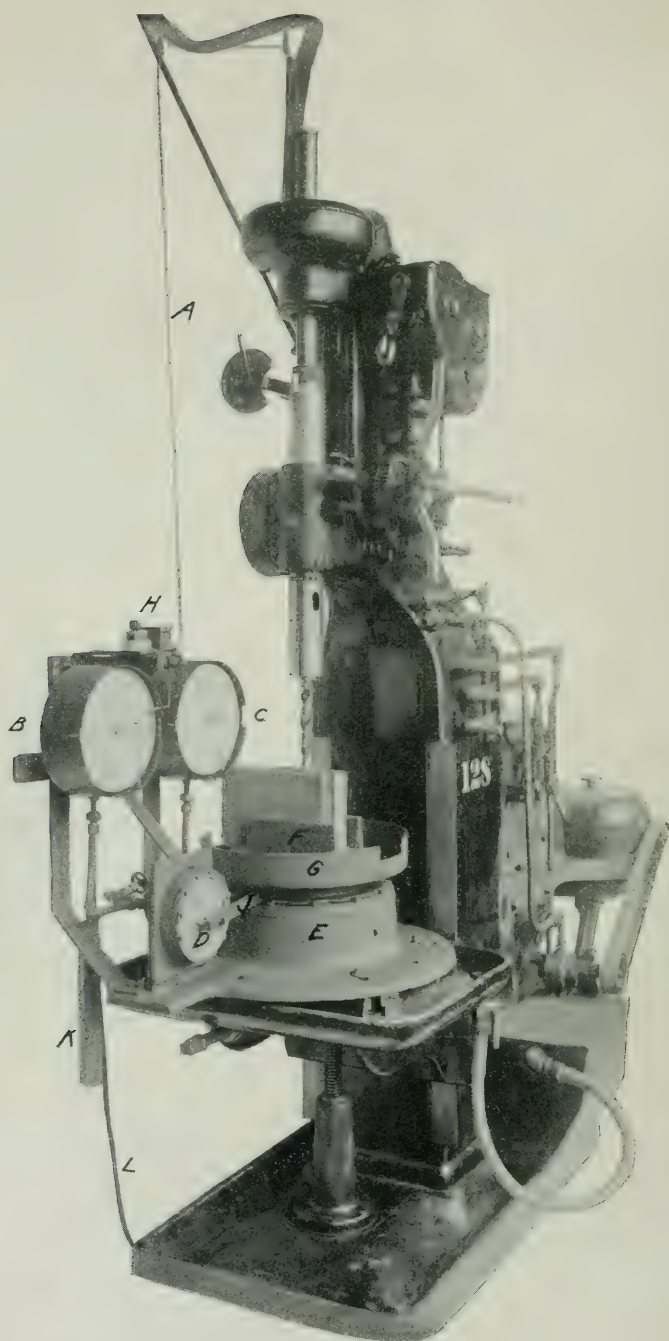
THE DRILL-PRESS AND DYNAMOMETERS
